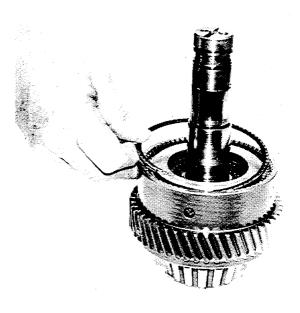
Removing or Installing the Internal Retaining Snap Ring on the Housing Gear.
